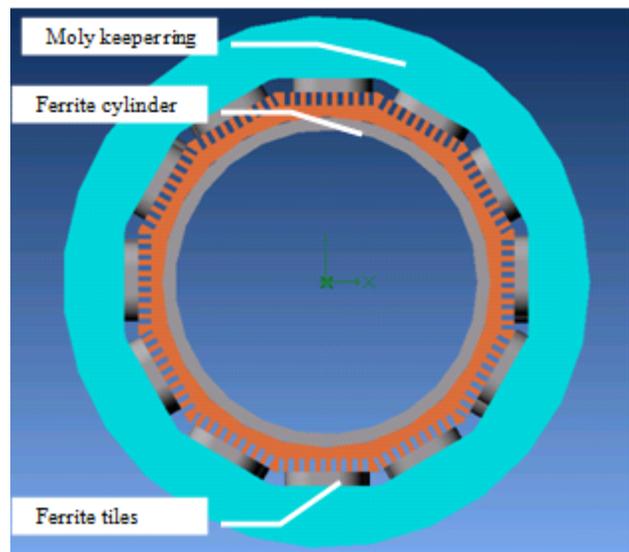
Top view of fixturing for a single braze cycle. The process brazes the outer ferrite tiles and places the inner ferrite cylinder in compression without braze material.
